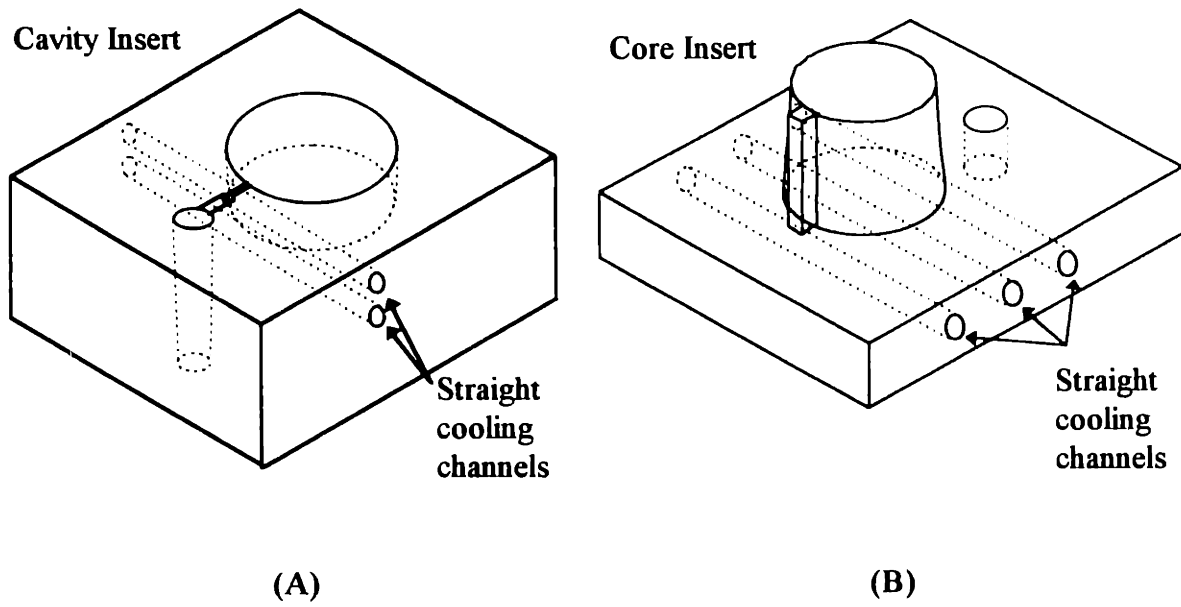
Cooling channel placement in the 303 stainless steel cavity (A) and core (B) inserts.
